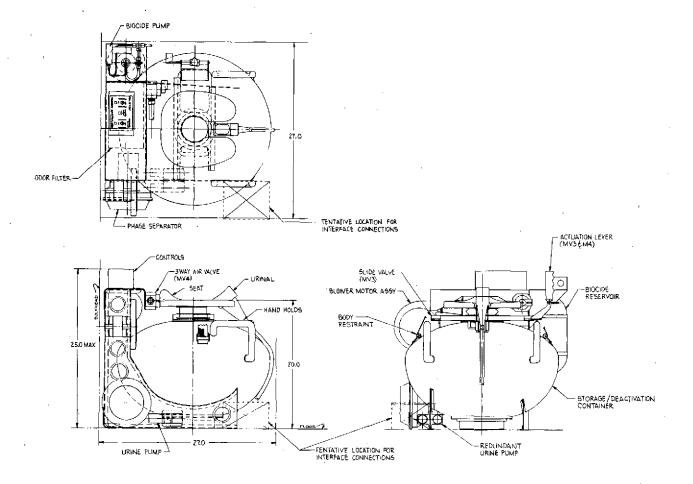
Preliminary Assembly Drawing of a Waste Collection System for Shuttle Orbiter
